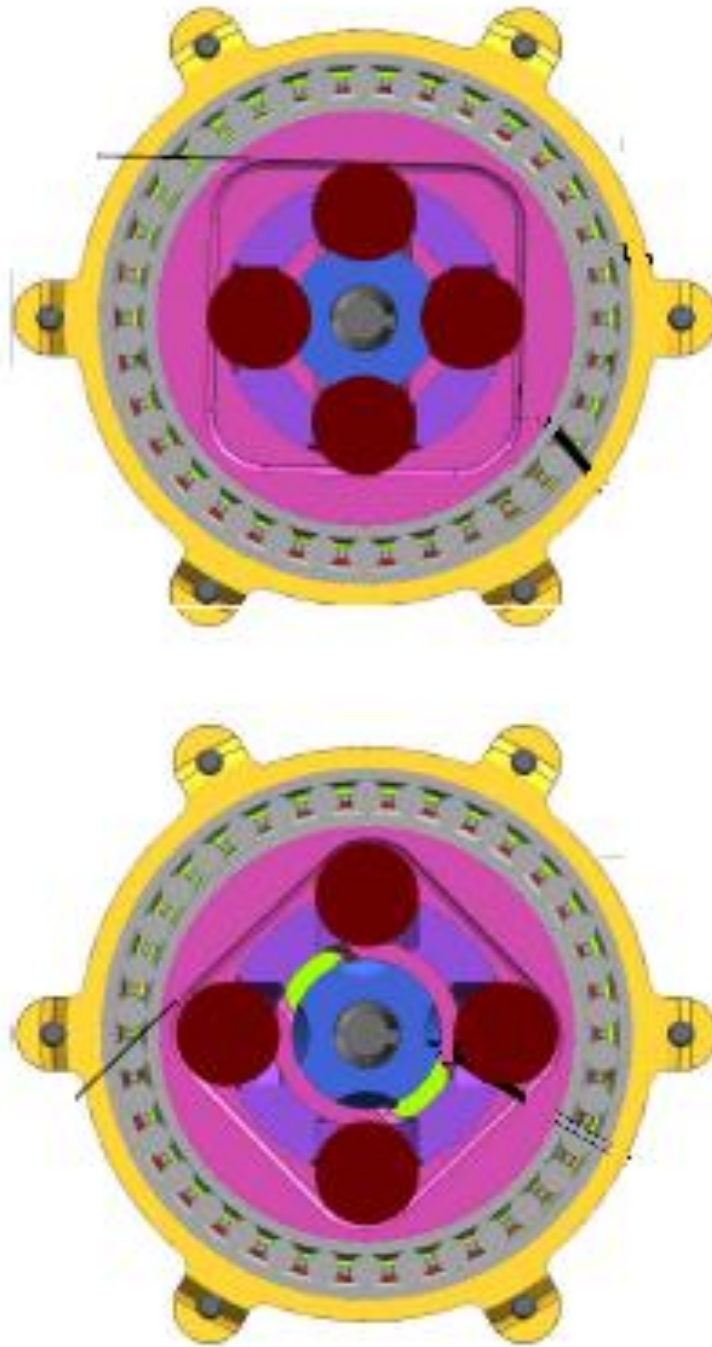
BitBox Unlocking of the Drill Bit Assembly
